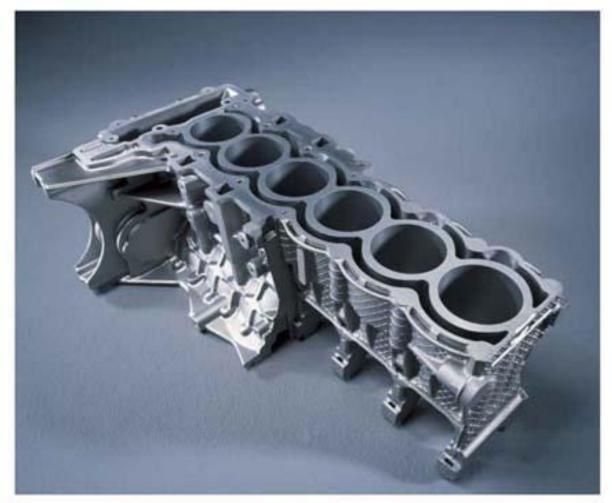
Sectional View Of Engine Block Courtesy of BMW OF NORTH AMERICA, INC.
